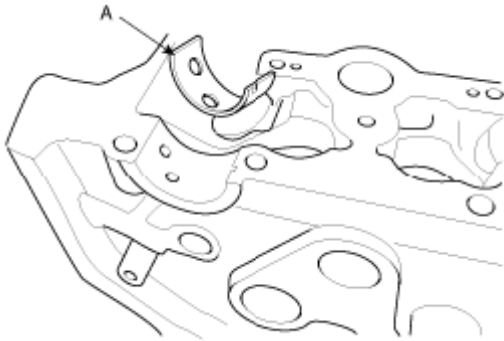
Identifying Exhaust Cam Shaft Lower Bearing
